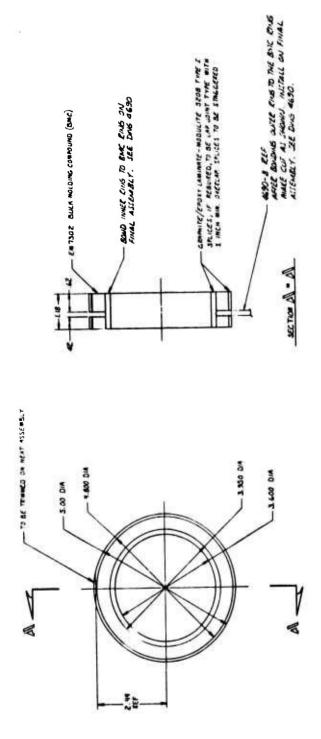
Bearing Ring, Main, Internal (WRD Drawing No. 4744).
